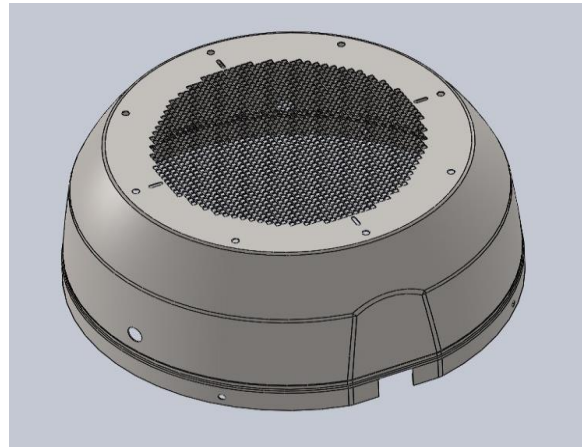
The drawpiece after collar cutting operation 2 – showing the base of operation for punching side holes.
